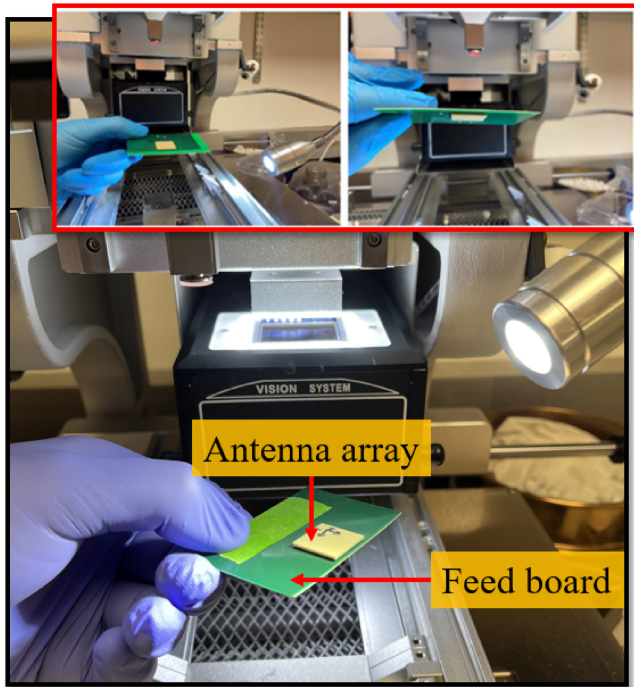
Assembly process for the AiP Integration: the antenna array being aligned, lowered, and mated to the feed board. The BGA solder spheres (BGASS) populated on the feed board element grid are also shown (top left).
